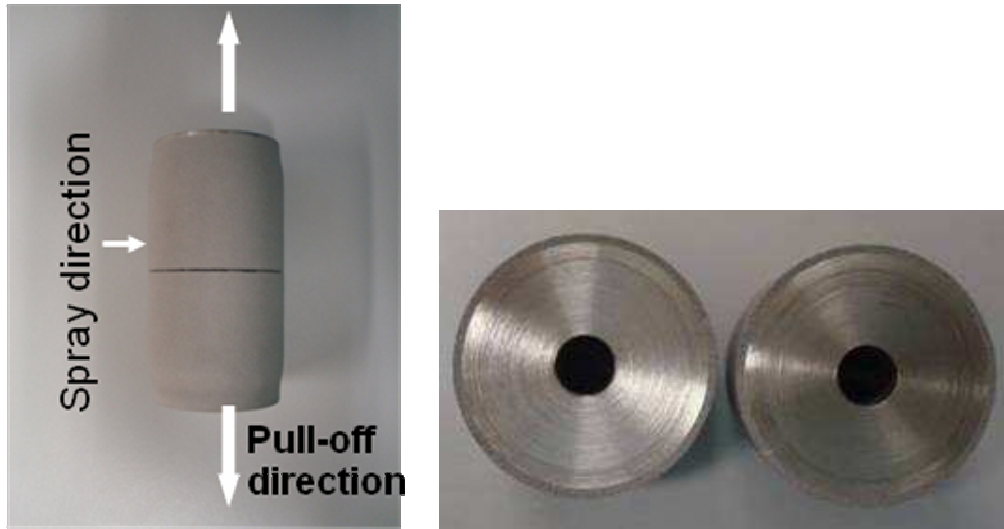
Tubular coating tensile (TCT) test samples after failure. (a) Plan view of the sample showing spray direction and pull-off direction in the tensile testing machine, (b) Cross-section of the samples.
